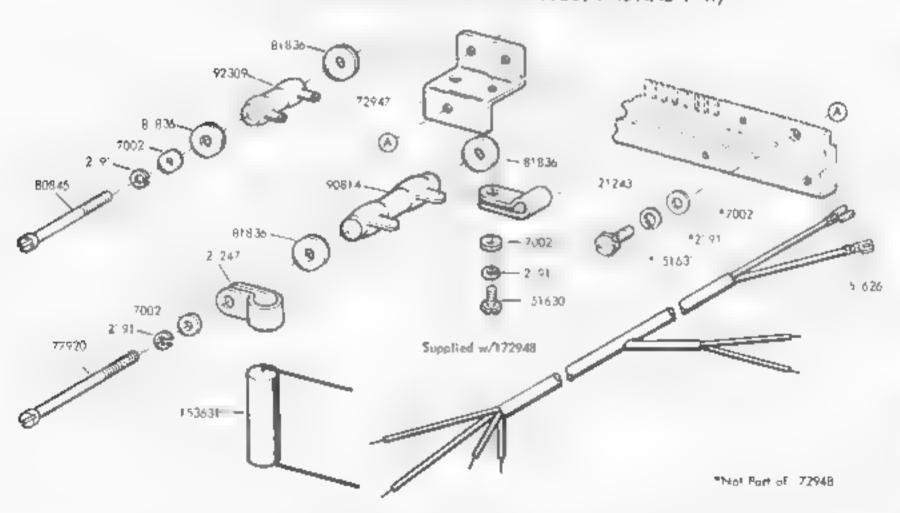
172948 RESISTOR ASSEMBLY (PART OF 172945 MODIFICATION KIT - SEE FIGS. 1-40 AND 1-43)
